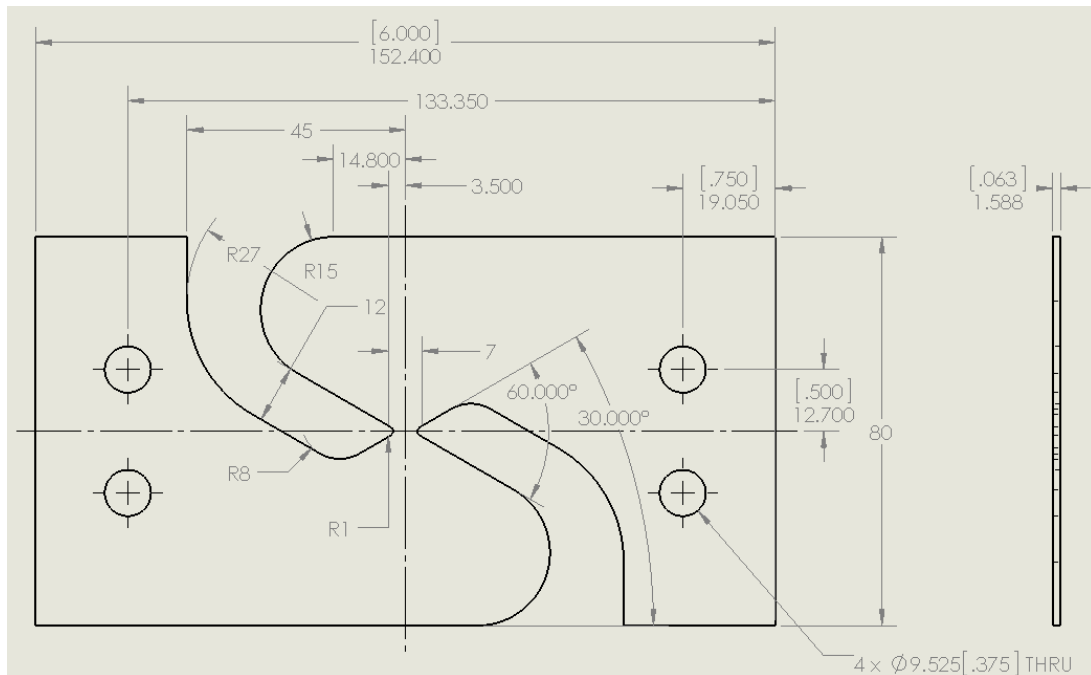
Technical drawing of the shear specimen (Courtesy of James Gose). This design is adapted from Bao & Wierzbicki's (2004) specimen design for pure shear tests.
